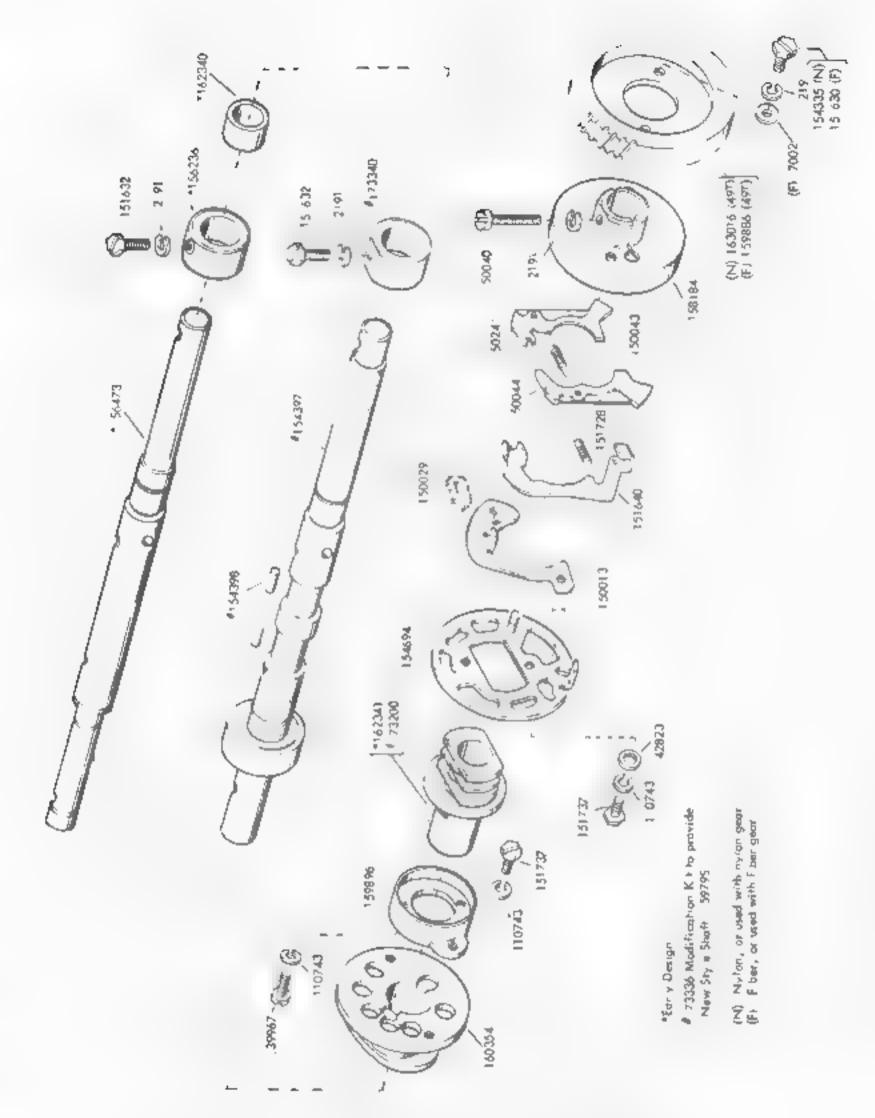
MAIN SHAFT MECHANISM (TYPING PERFORATOR)
